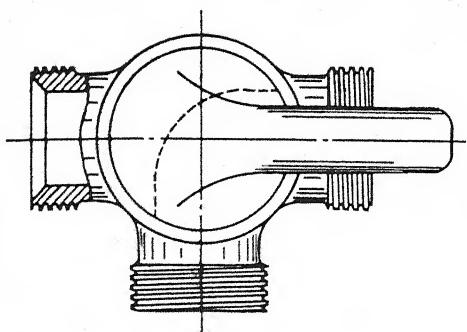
Plug valve for feeding one of two systems. (Courtesy Tri-Clover Machine Co., Kenosha, Wis.)
